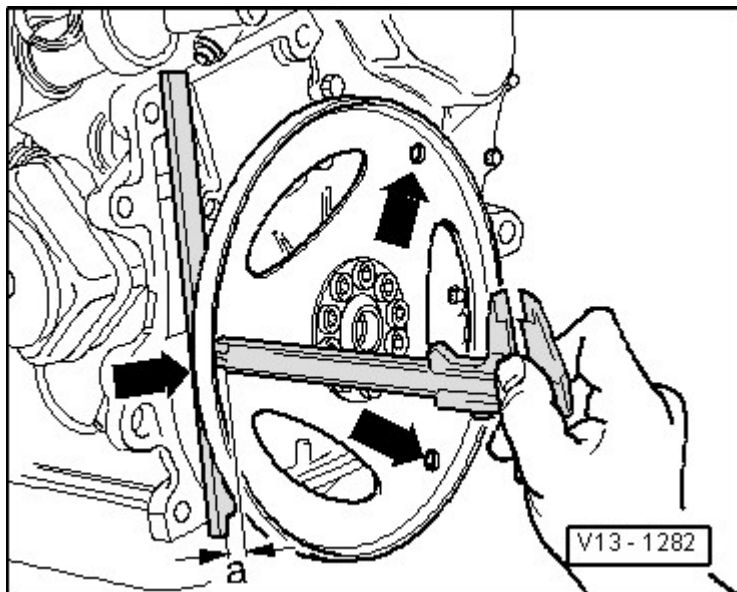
Checking Dimension Through 3 Holes For Securing Torque Converter Using A Straight Edge And Depth Gauge And Calculate Average
